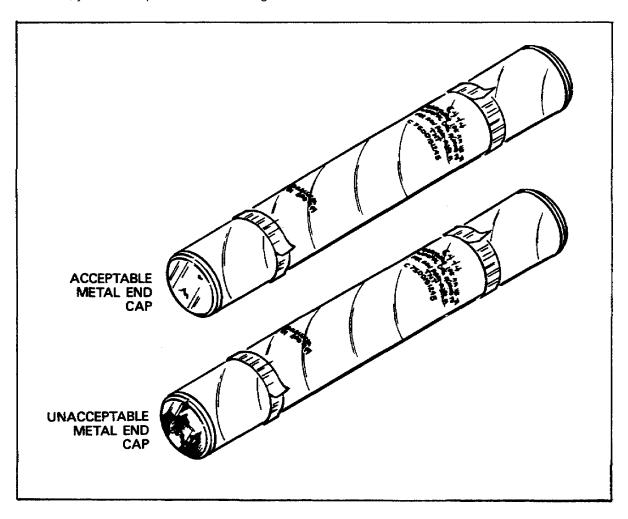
Inspecting the Metal End Caps of a Fiber Container.
